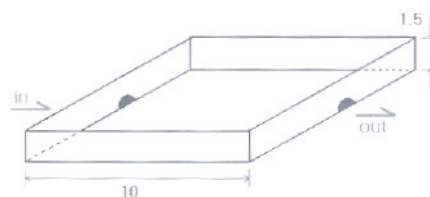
The structure of the combustion chamber (the size is in millimeter)
